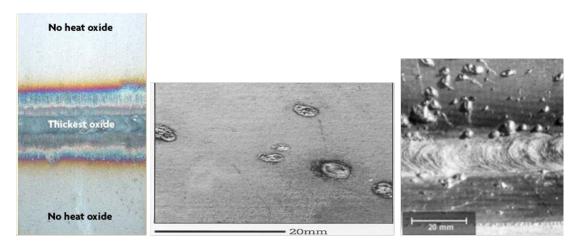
From left to right: heat tint, arc strike, and weld spatter – different surface defects produced during welding.^{6,7}
